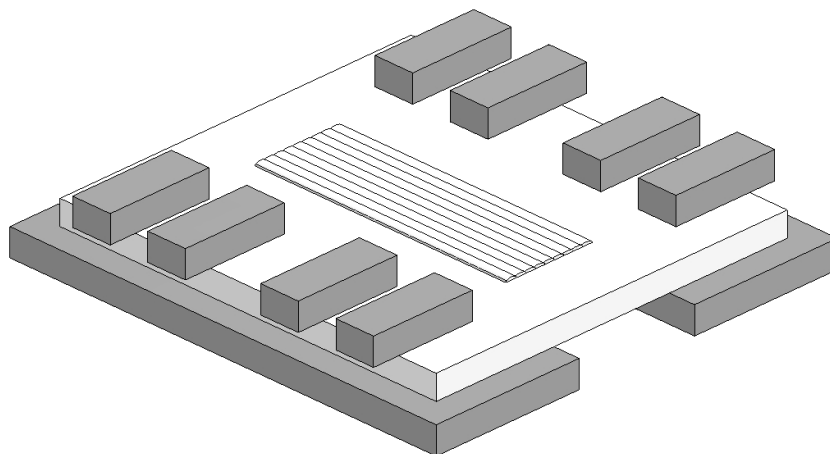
Clamping conditions for 300 mm plate (surfacing welding)
